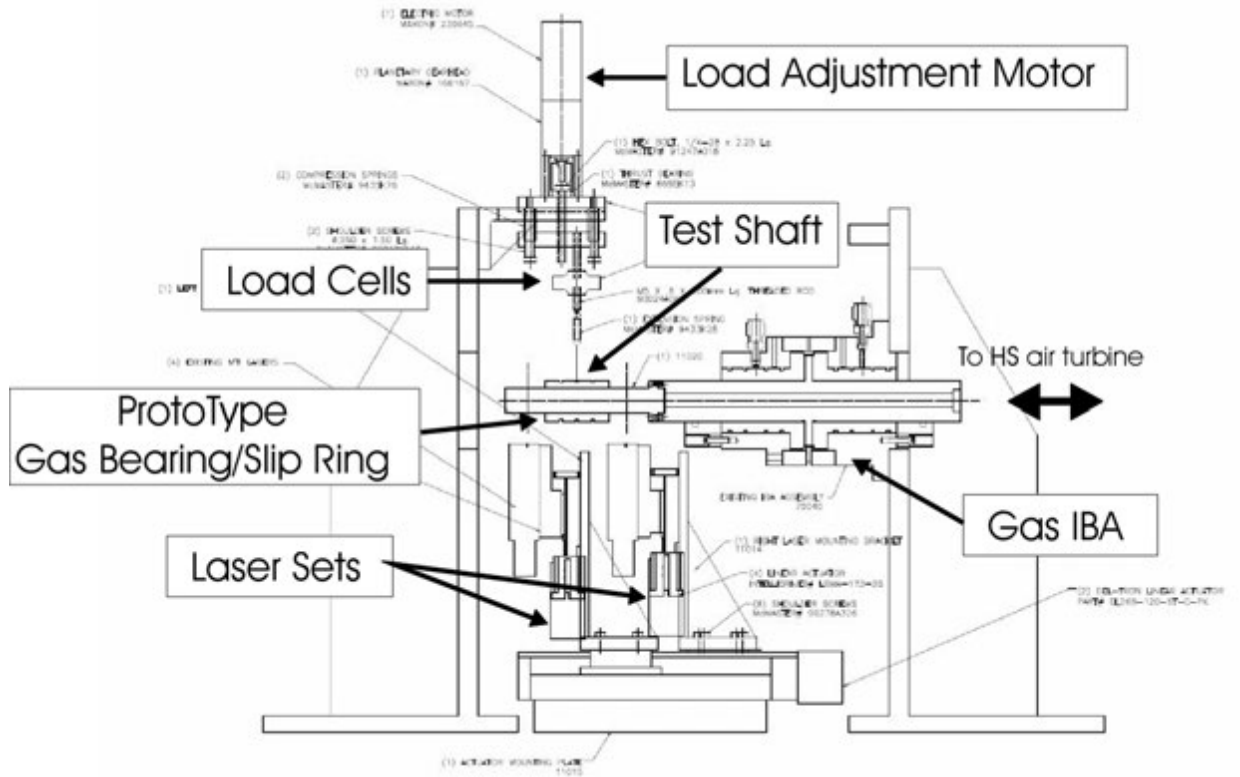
Annotated assembly drawing of the side view of the gas bearing test stand.
